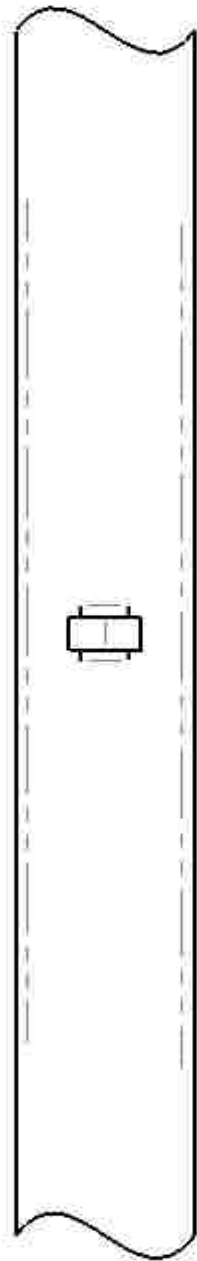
Side View. Bi-Cantilevered Drain/Cantilever composed of a Rectangular Drain and two Rectangular-shaped Cantilevers attached to the Base.
